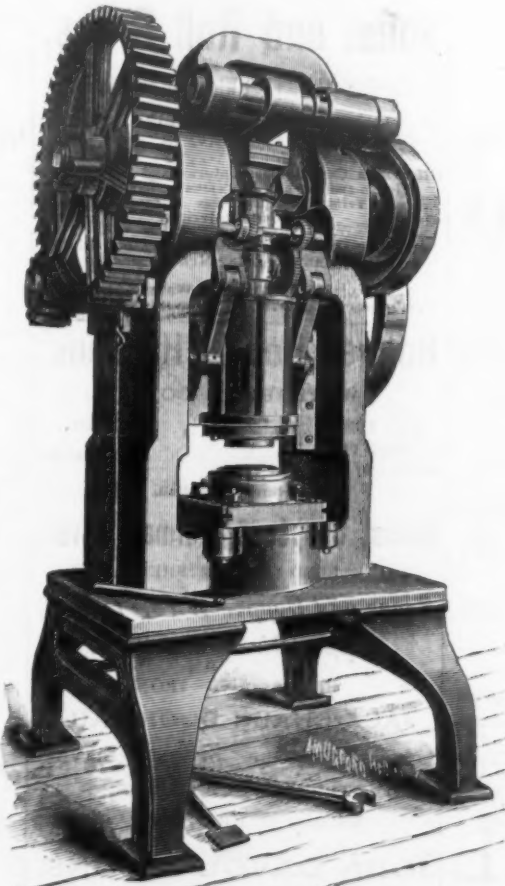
Toggle-Joint Sheet-Metal Drawing Press.
